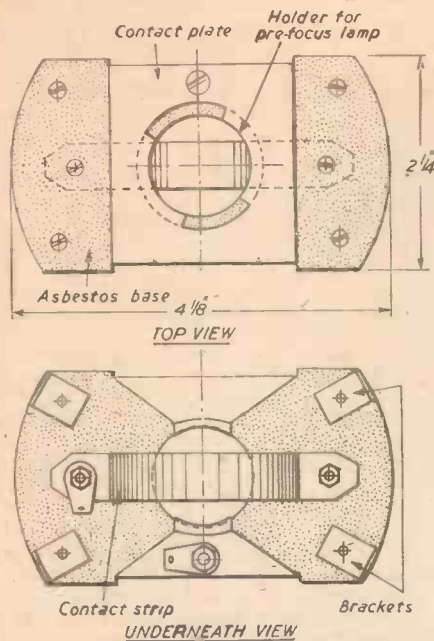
Two views of the assembled asbestos base and contact plate.
